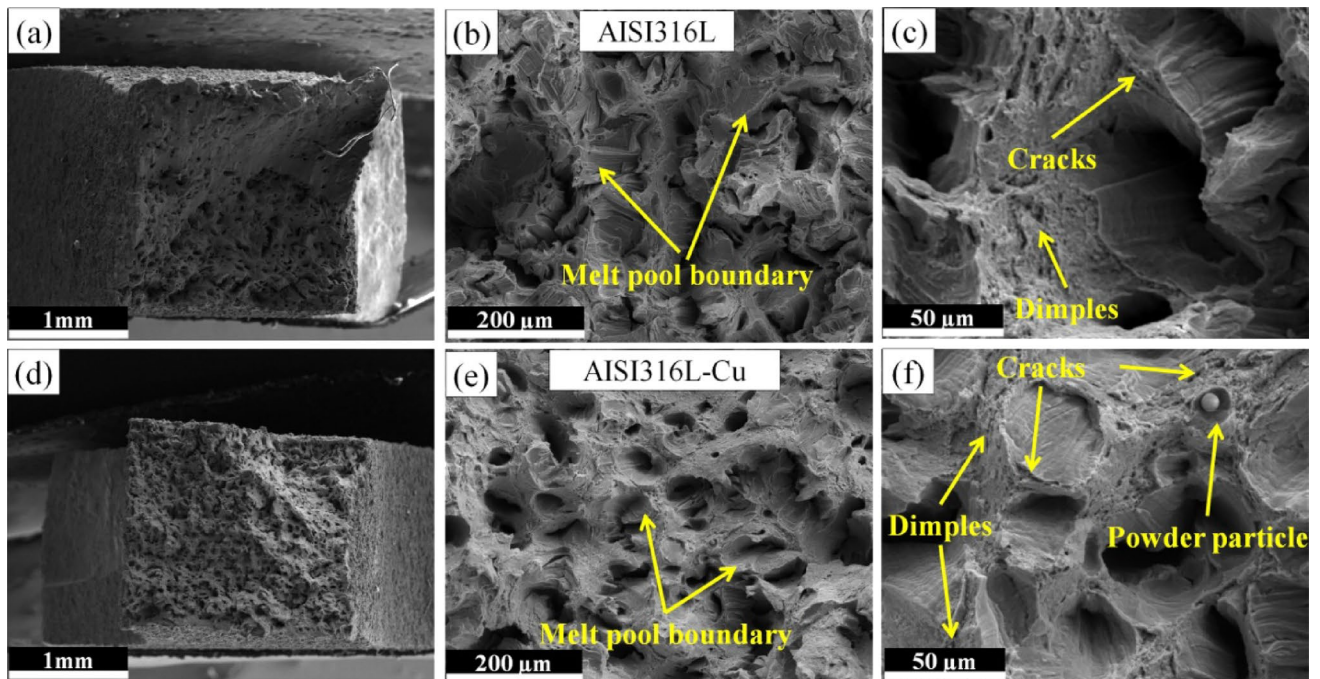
Fracture surfaces of the a–c as-built AISI316L and d–f AISI316L-Cu samples
